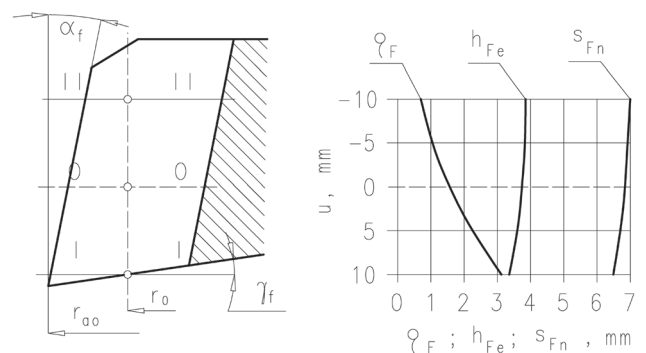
Variation in the parameters of the critical section of an internal gear with the tool regrinding rate of a gear-type tool: I–I, section of the new tool (before the first sharpening); O–O, initial section ($u = 0$); II–II, section of the tool after the last sharpening. The parameters are calculated according to the method given in reference [11]
